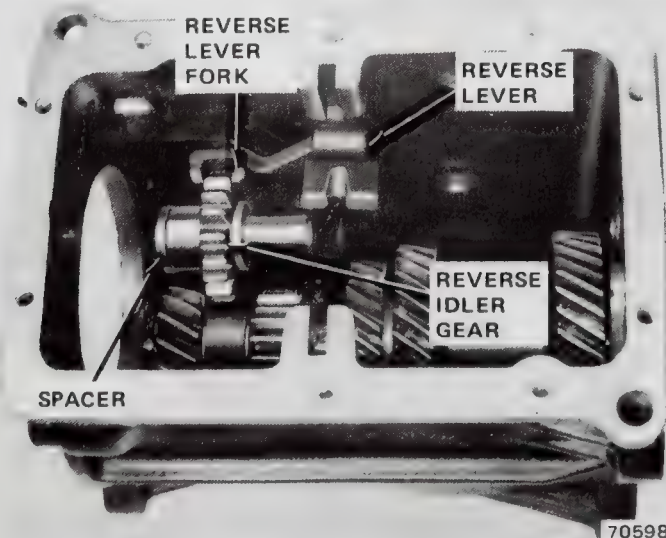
B-70 Assembled Position of Reverse Idler Gear, Idler Gear Spacer, Reverse Lever and Lever Fork
